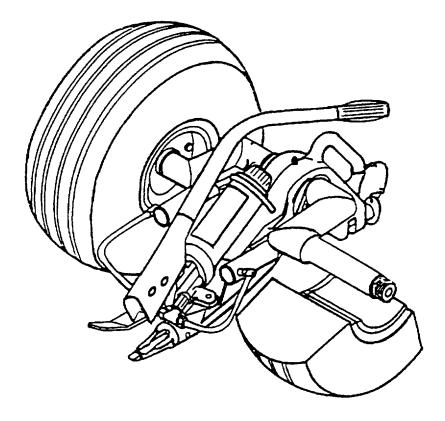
Ground Handling Wheels Assembly (Model 214-706-104-101)
